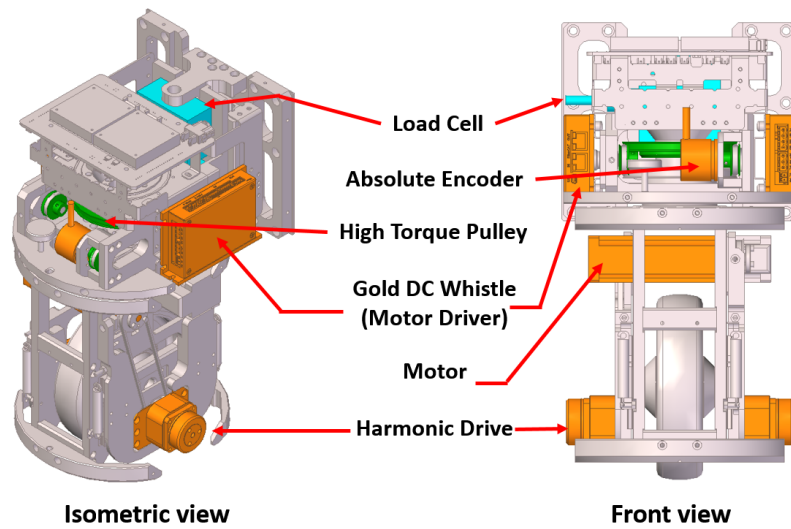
Rendering of Synchronous Drive Module, labeled, with drive wheels removed to highlight harmonic drive mechanism.
